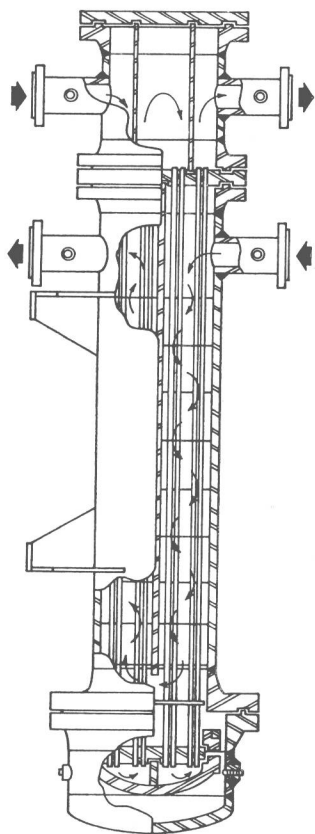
J. Split-ring removable floating head, four-pass tube-side and two-pass shell-side. (By permission, Engineers & Fabricators, Inc.)
